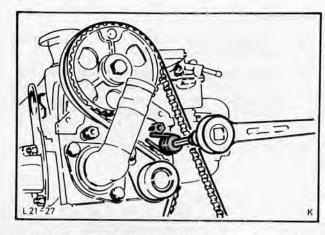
Slacken belt tensioner using Special Tool 21-012
